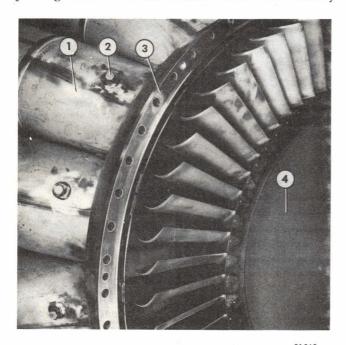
Turbine Nozzle Inner Ring Position Gage
